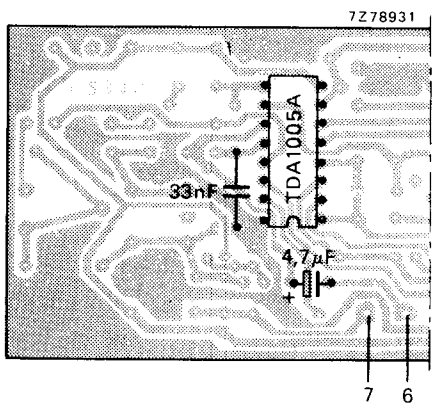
Printed-circuit board component side, showing component layout of Fig. 13.
